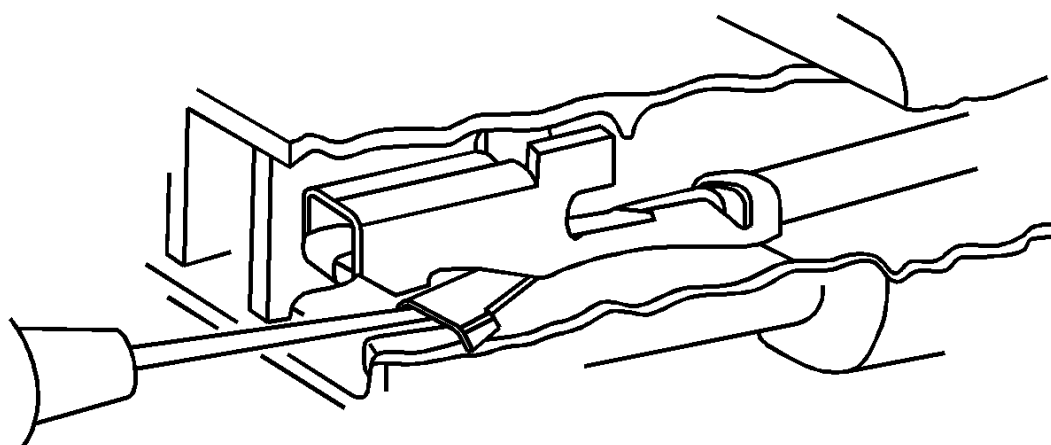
Aligning Removal Tool - Delphi (Pull To Seat)
